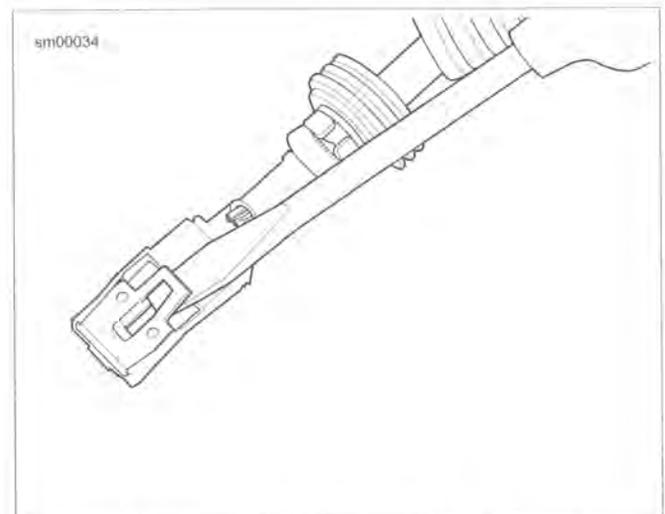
Delphi 800 Metri-Pack Sealed Main Fuse Housing: Bend Tang
